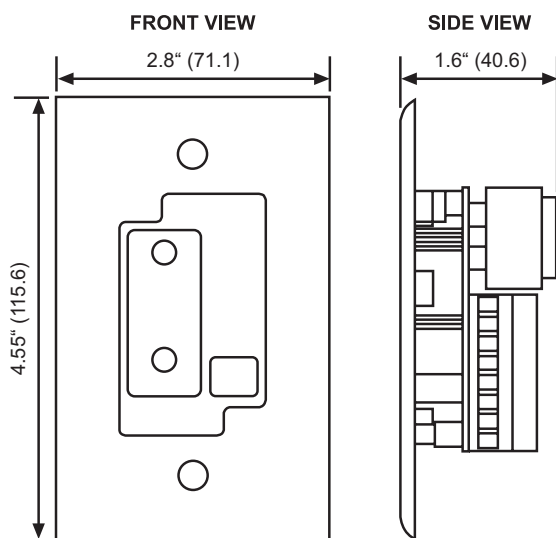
Single-gang wall plate dimensions in inches (mm)
